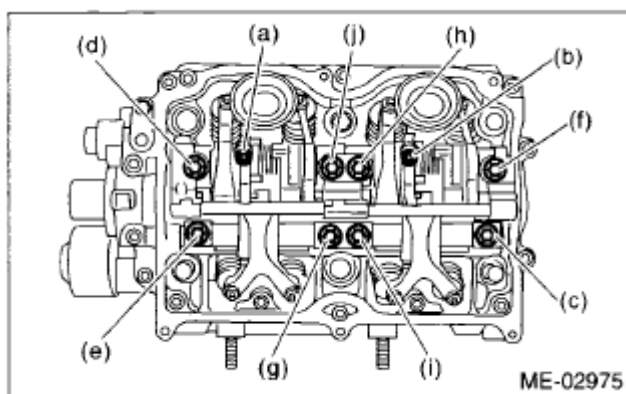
Identifying Valve Rocker Assembly Bolts Removal Sequence
